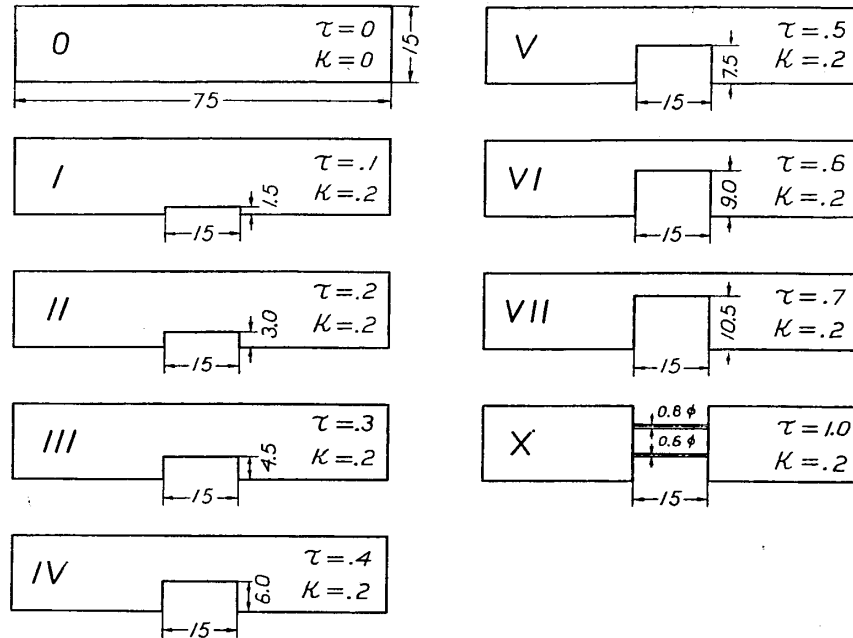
Dimensions (in cm) of the models used in the test of the effects of extending a cut-out in the direction of the chord.
